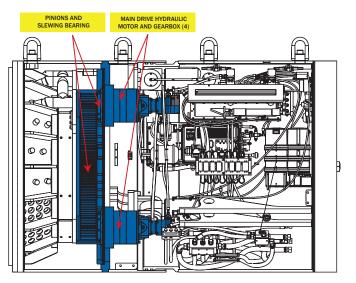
Face access periphery drive MTBMs contain four interior motors on the periphery of the gear ring with pinions on a slewing bearing (some components removed for visibility).
